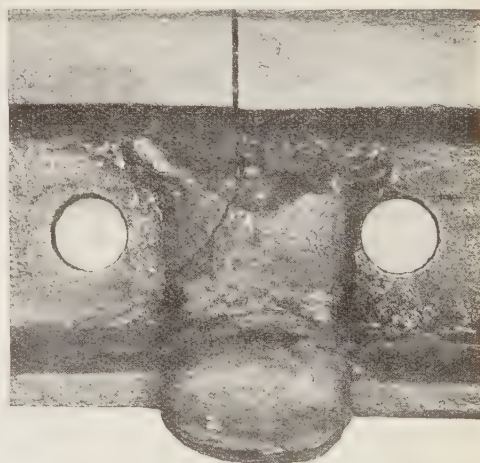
Crack in a thermit-pressure weld (with inserted plate). (French *Est.*)
